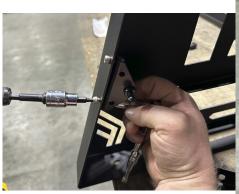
& FIG 17 - Mount Strut Mount Bracket to Side Panels and Rear Hatch
